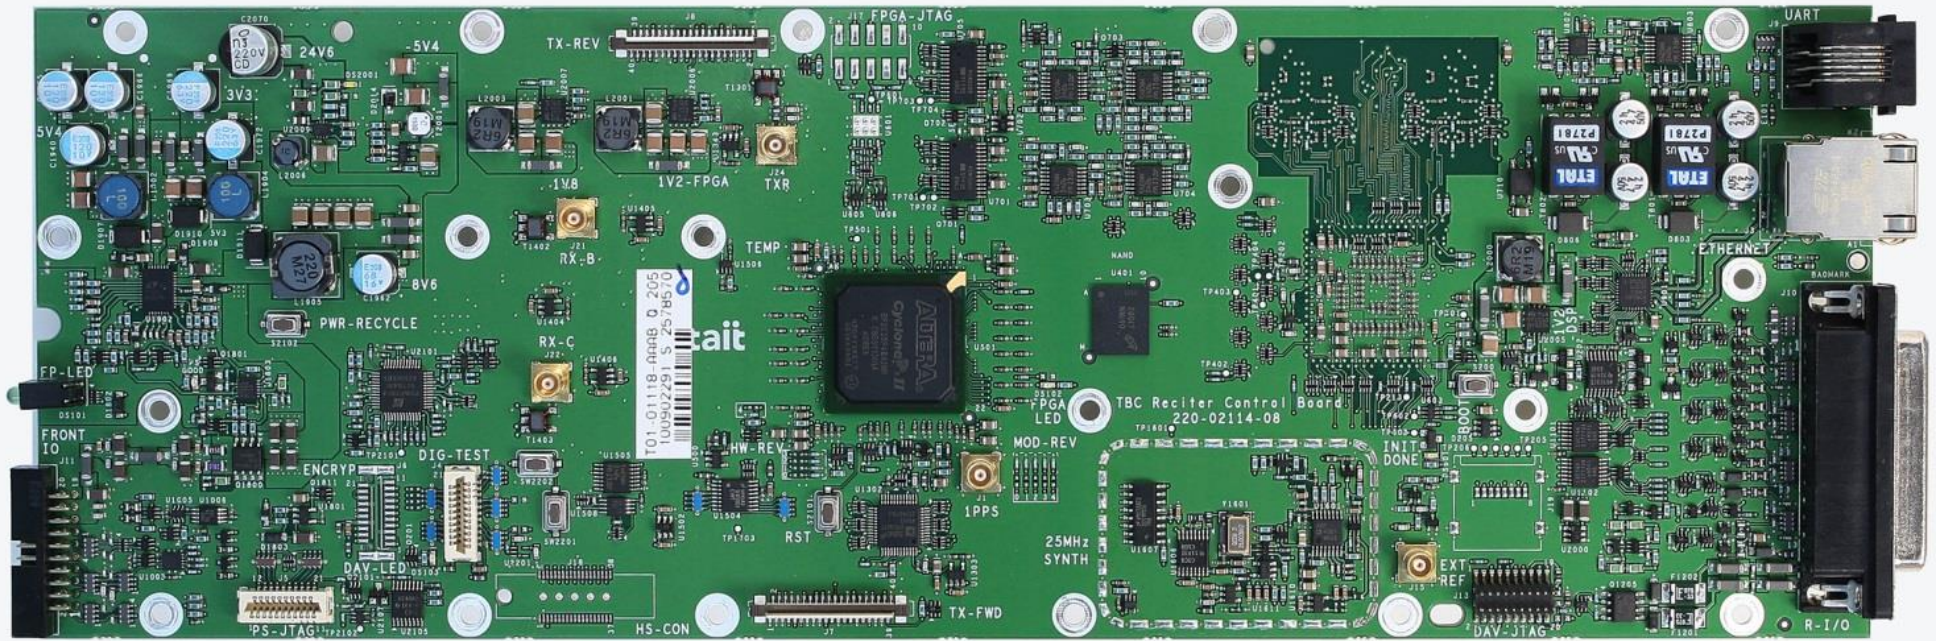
Reciter module (440-480MHz) – Internal (Control PCB side)
